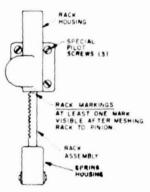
Rack assembly and rack housing. Note rack marking position.
